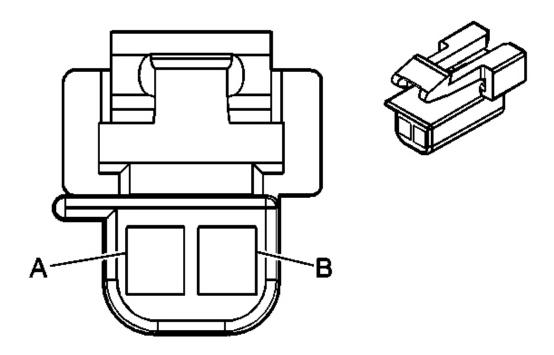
Speaker - Left Front Door (UQA) Connector End View Courtesy of GENERAL MOTORS CORP.
